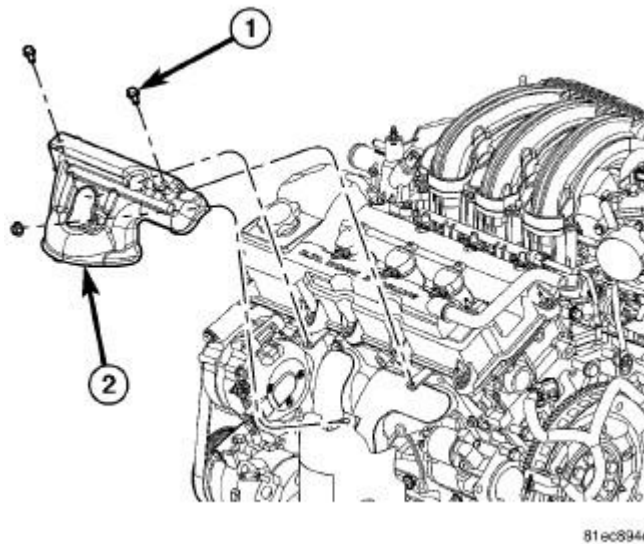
FRONT MANIVERTER HEAT SHIELD
